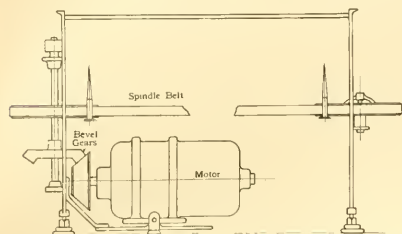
OLD METHOD OF DRIVING SILK SPINNERS WITH HORIZONTAL MOTOR AND BEVEL GEARS
